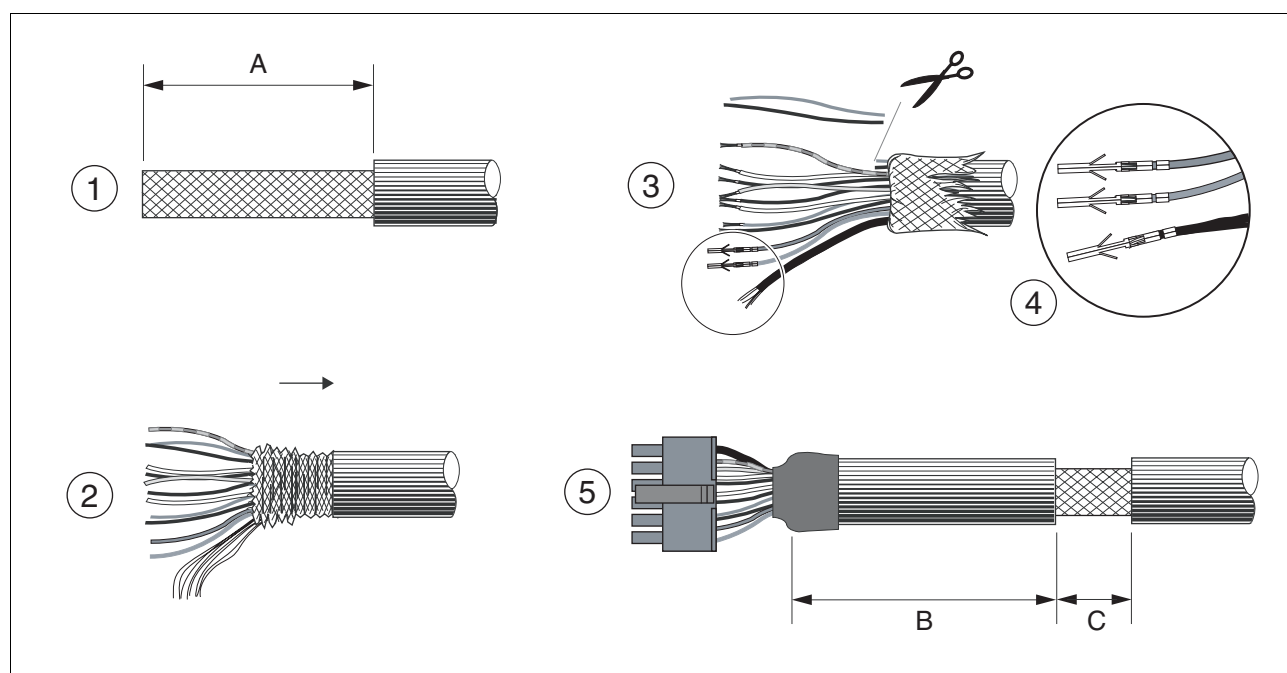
Steps (1-5) for fabrication of the sensor cable
